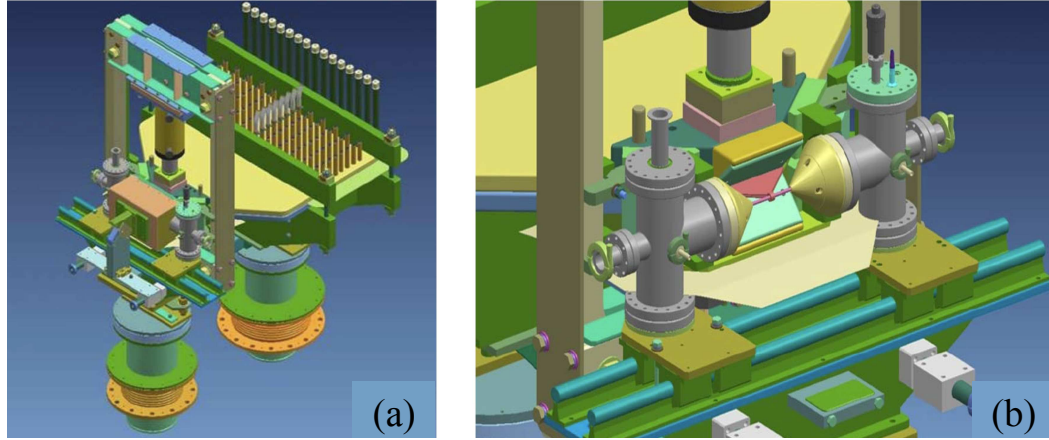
(a) CAD drawing of collector bus with 96 cables attached to it. (b) STC mounting system with 100-ton hydraulic press to clamp the coil into the front assembly [95].
